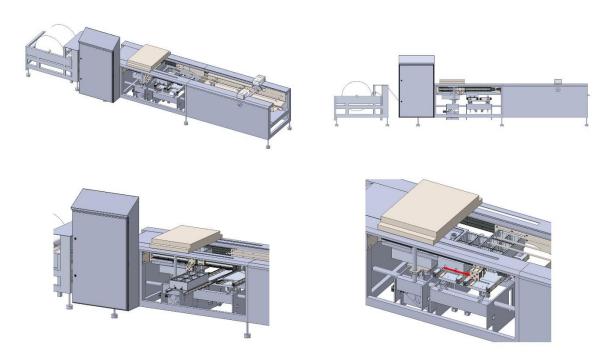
Drawing of the flexible mould shift system in Wageningen
